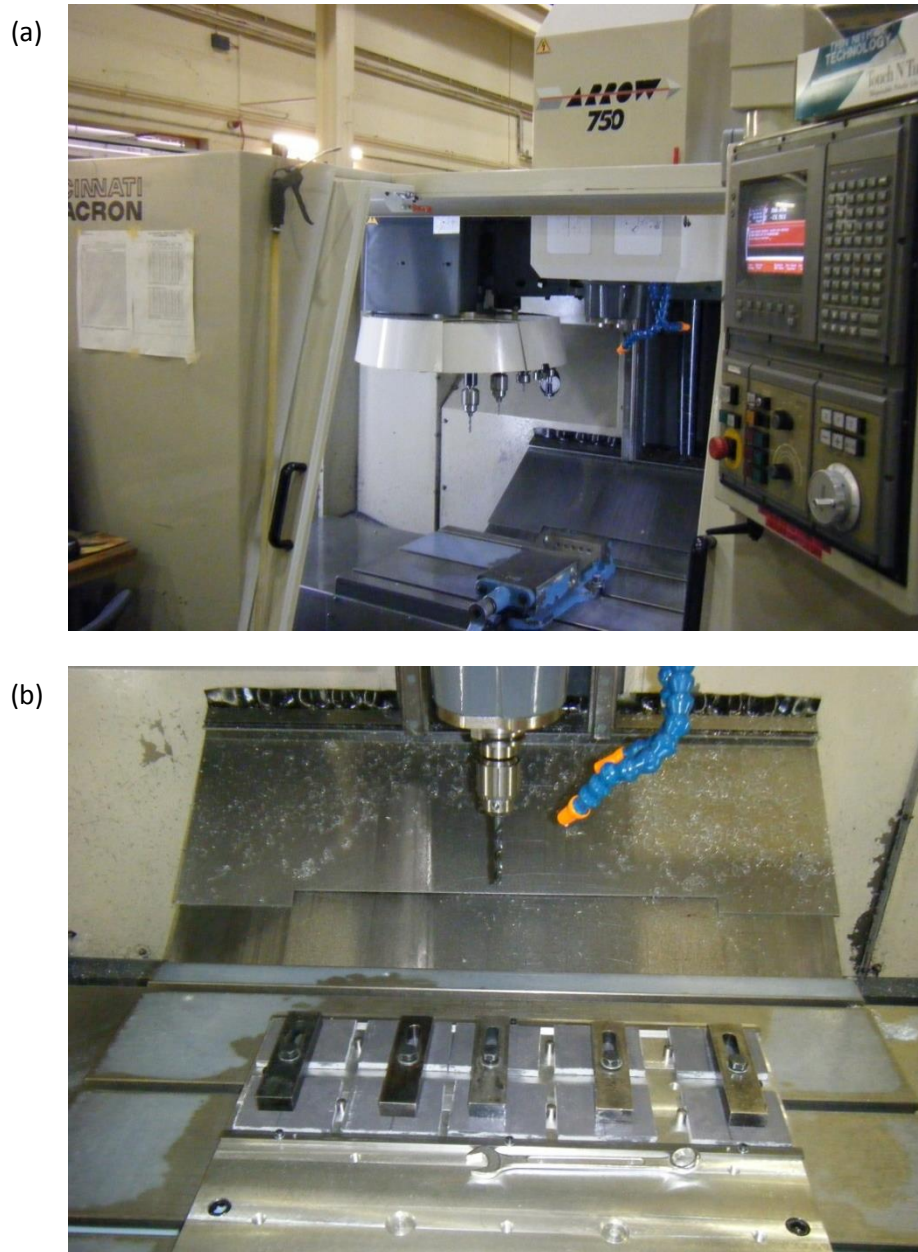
Machining Setup with (a) Cincinatti Arrow 450 Milling machine and (b) Specimen Blanks in the drilling Jig
